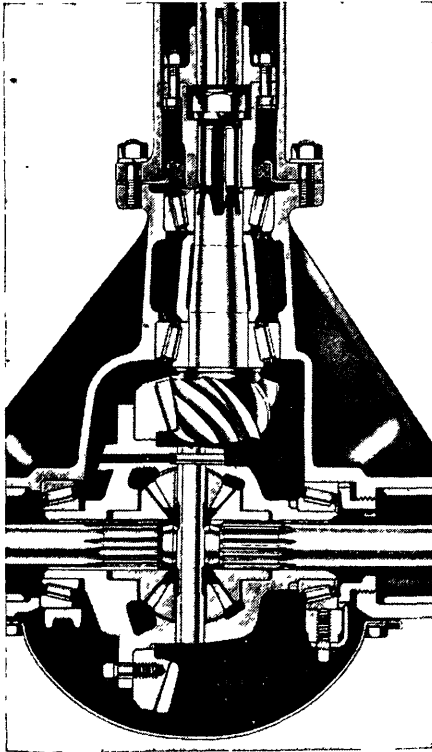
1949-52 Ambassador rear axle. During 1951 production the rear axle side bearing adjusting nut was eliminated and the adjustment is accomplished in the same manner as Statesman and Rambler axles.
